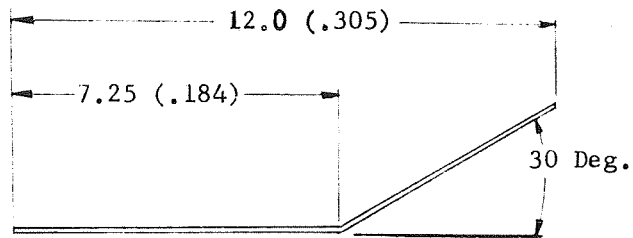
Perforated Sheet Film Cooling Liner. (Dimensions are in inches (m).)
